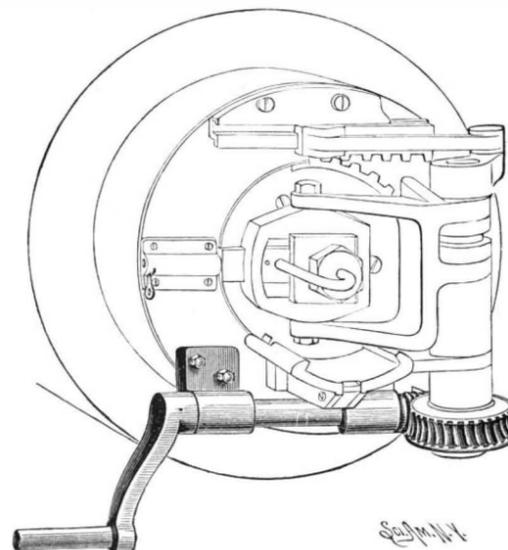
GEARING USED ON GUNS OF LARGE CALIBER TO WORK MECHANISM.
